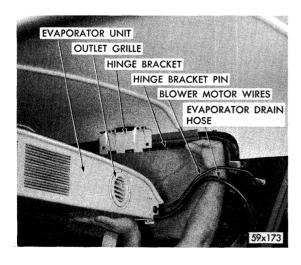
Removing or Installing Air Conditioning (Roof Unit)
